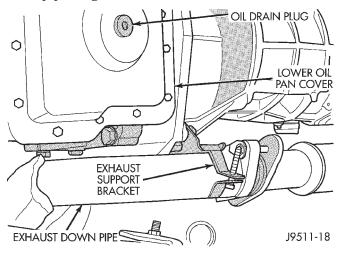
Exhaust Down Pipe to Front Exhaust Pipe
